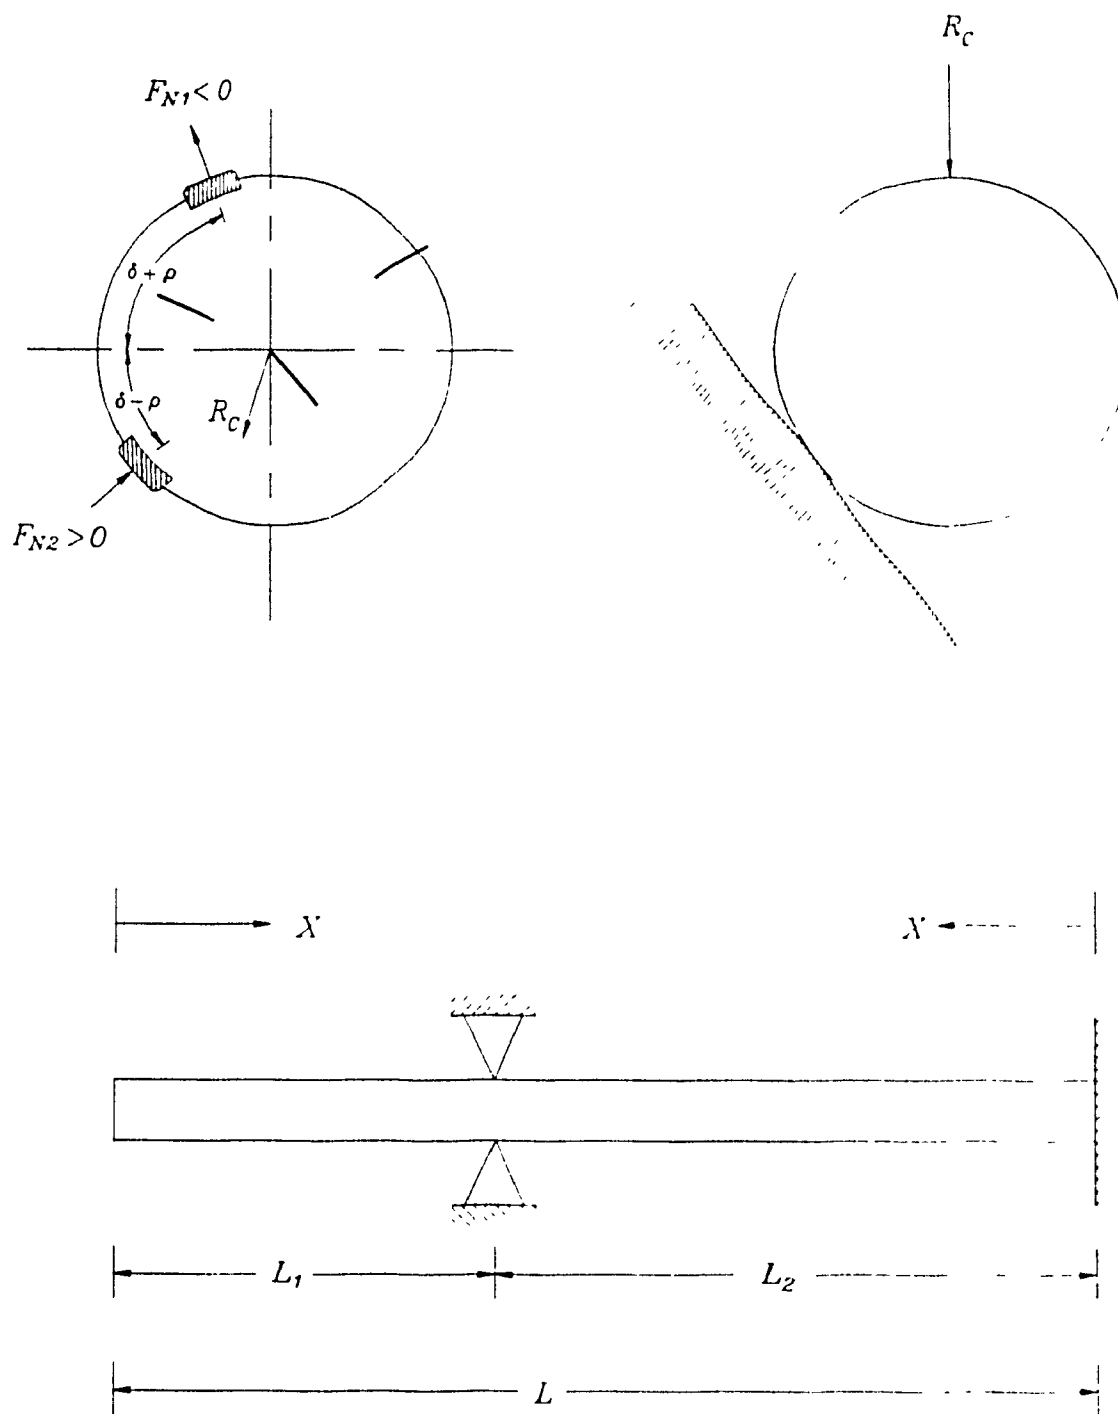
Model of Cutting Tool-Boring Bar Assembly at Unstable Equilibrium
